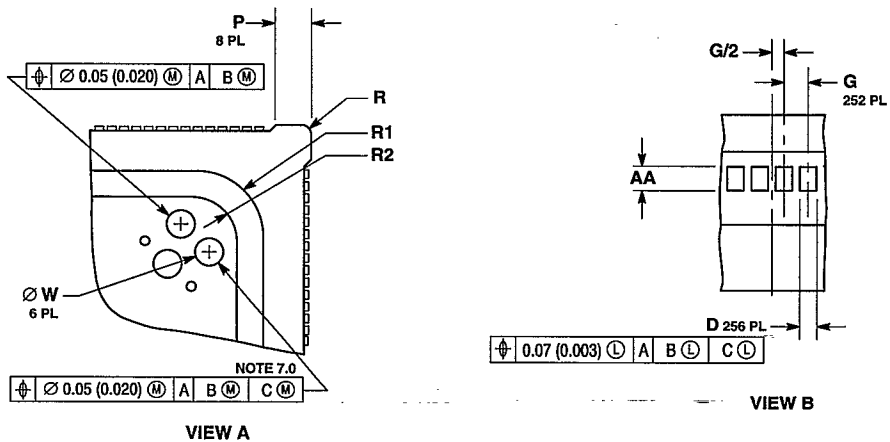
160-Pin QFP (with Molded Carrier Ring) Package Dimensions (3 of 3)
